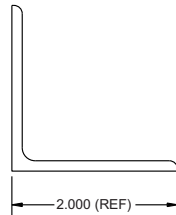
Nozzle Bracket, P/N 83-131019-001)
